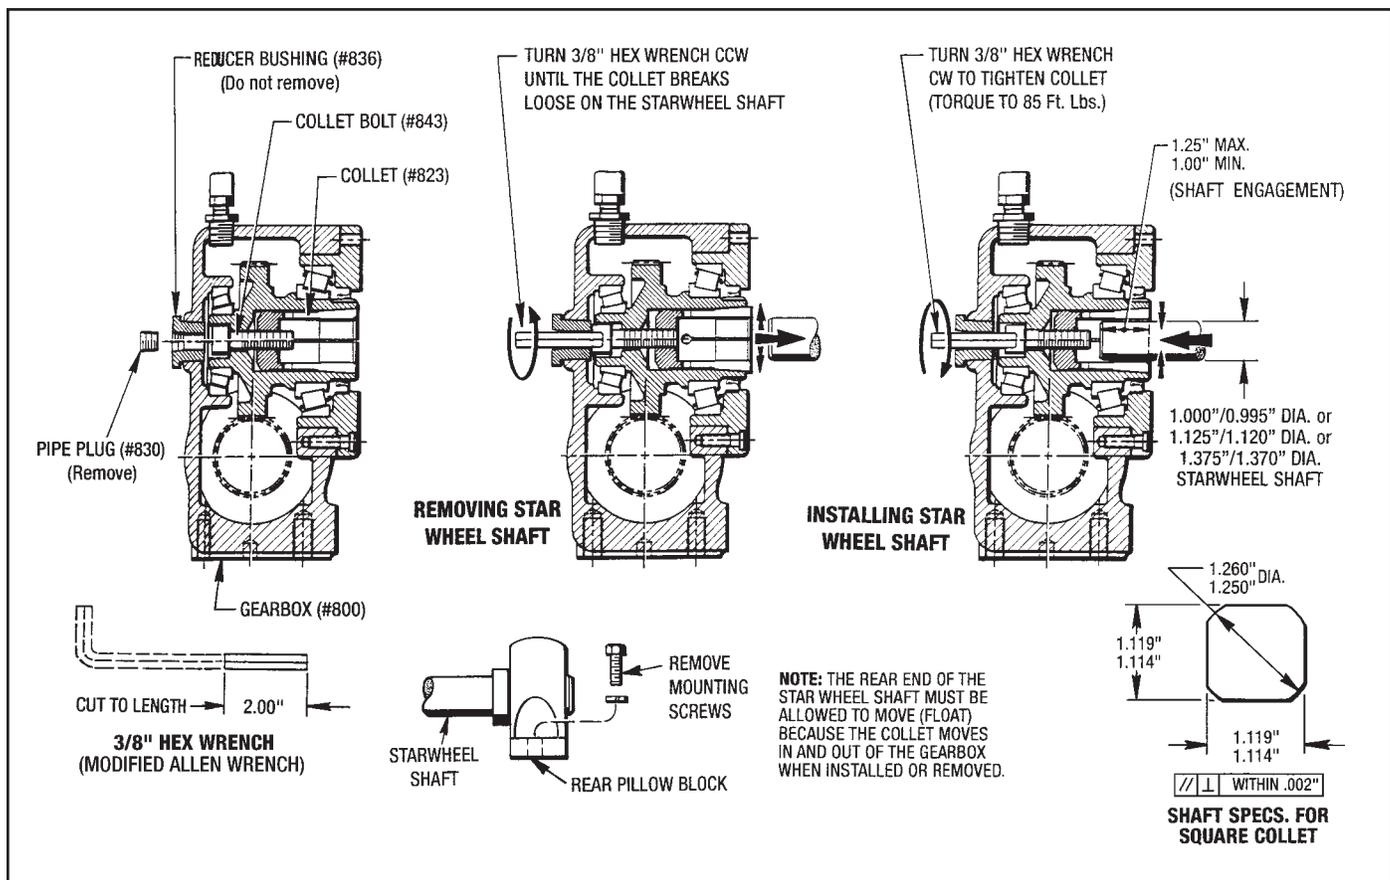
Installing Starwheel into the Gearbox Collet
